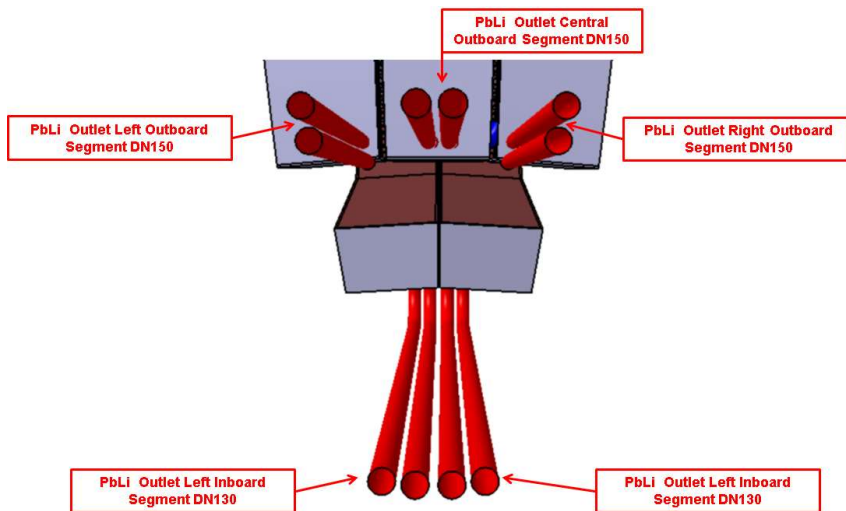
Layout of WCLL BB feeding pipes in the lower part
